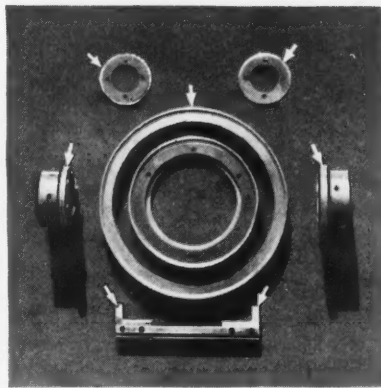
Dies with Hard-surfaced Cutting Edges for Cutting Sheet Steel
